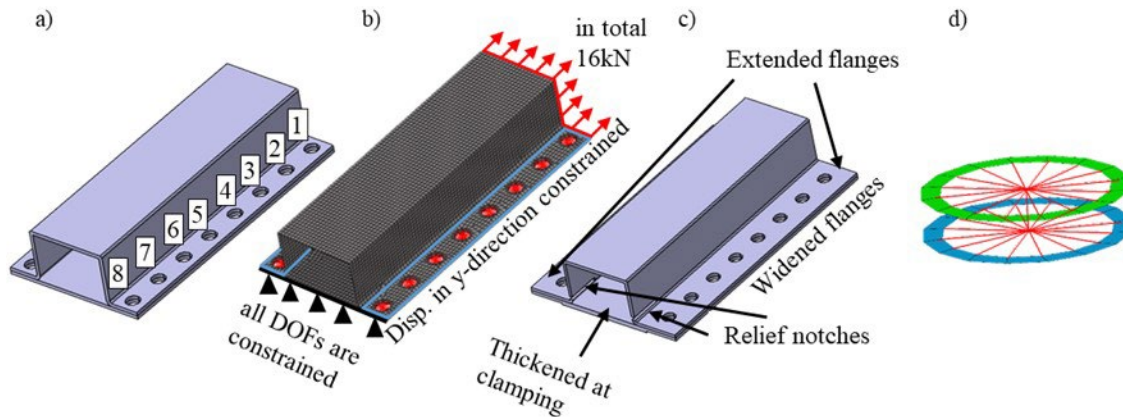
a) Initial product design b) Load case the given joining task c) Final product design after improvements d) Beam-rigid-spider element
